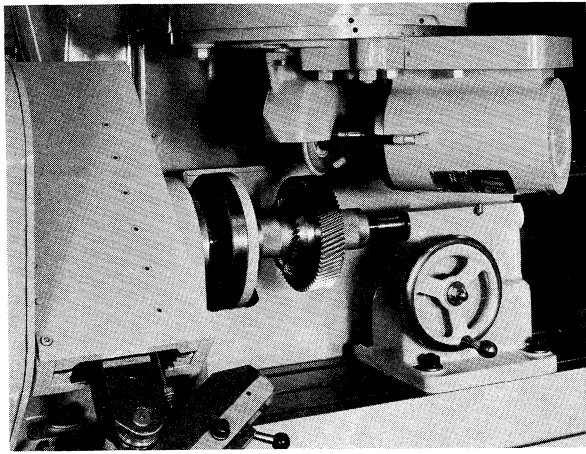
Grinding wheel above work gear in angular relationship for form-grinding of the teeth.
